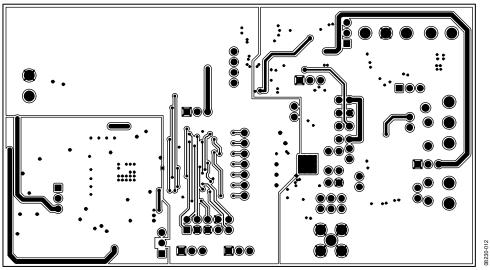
AD5422 LFCSP Evaluation Board Solder Side PCB
